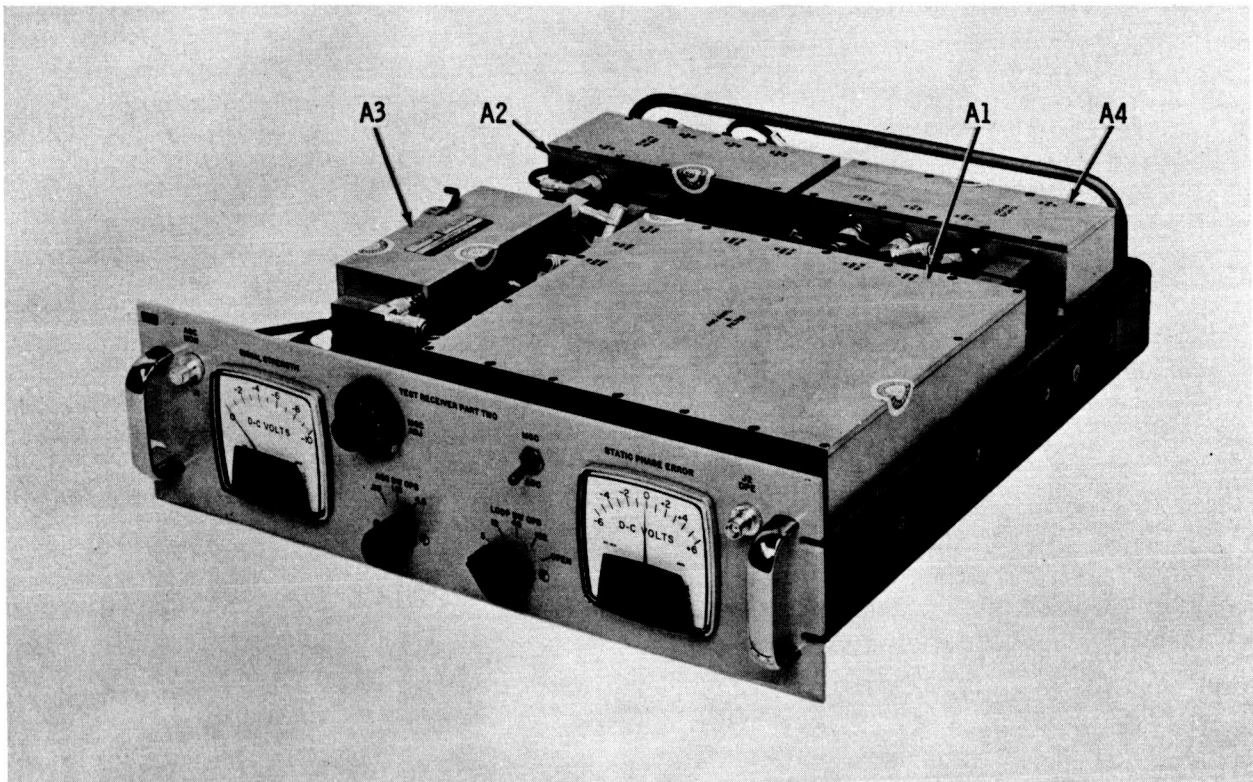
Test Receiver, Part Two (1A5), Top View
